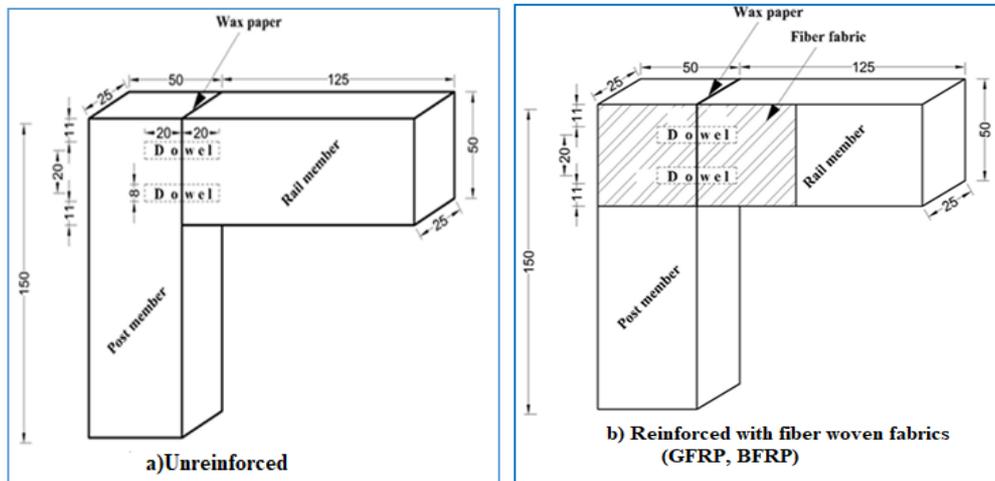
General configuration of L-shaped joint specimens (dimensions in mm)
